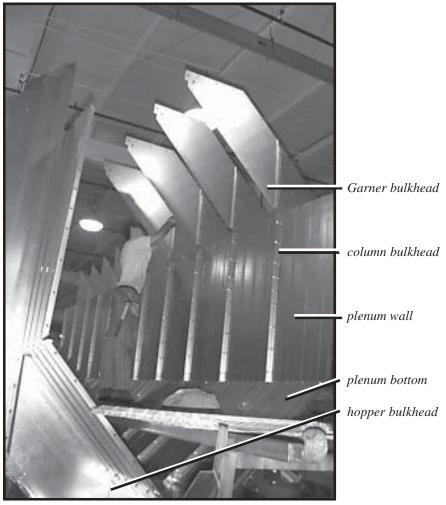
Loosely bolting garner bulkhead to column bulkheads through length of dryer.
